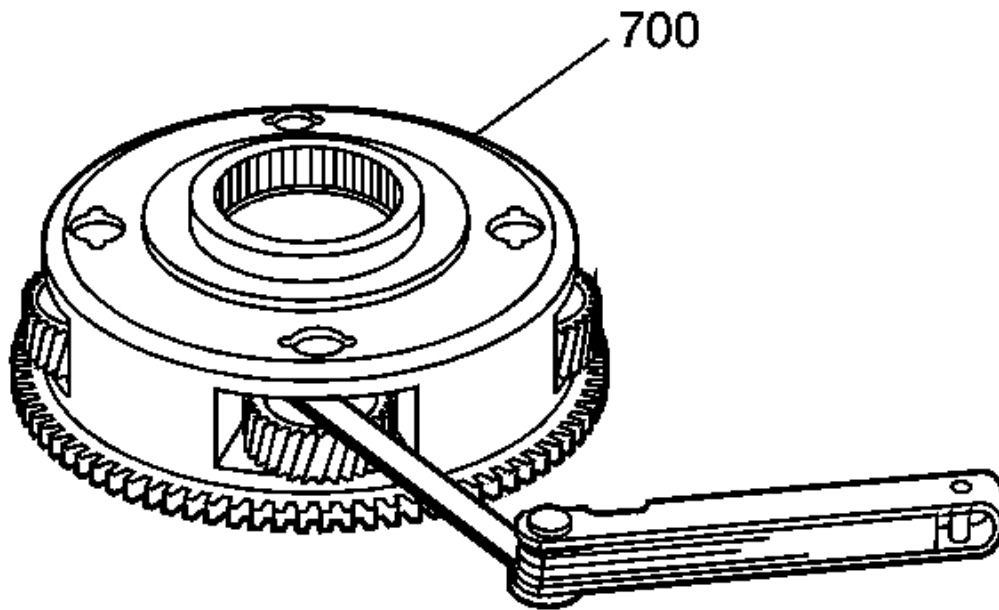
Measuring Input Carrier End Play With Feeler Gage
